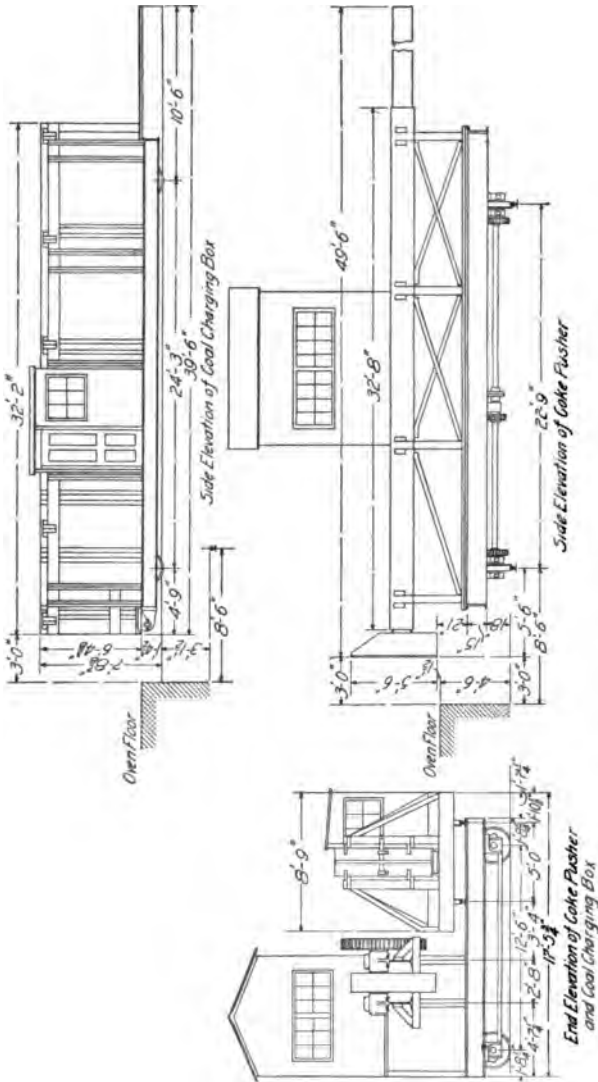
DETAILS OF COKE PUSHER AND CHARGING BOX
